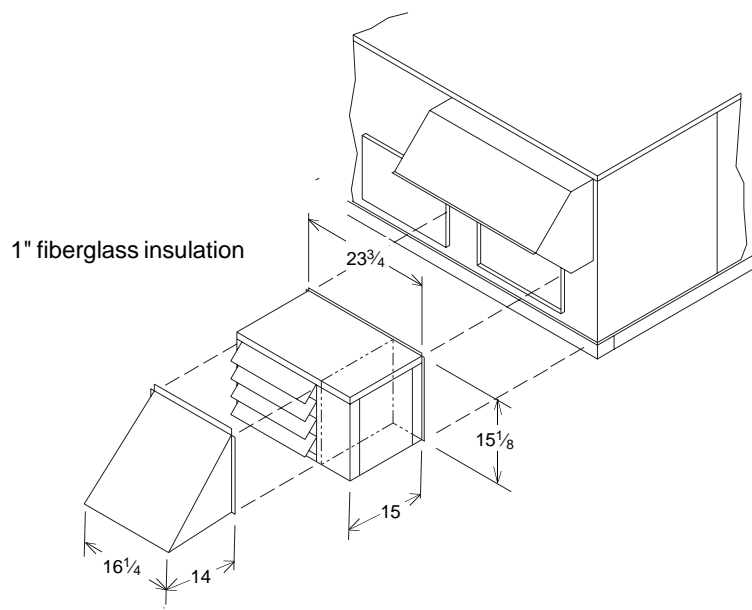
POWER EXHAUST ACCESSORY DIMENSIONS (inches)
